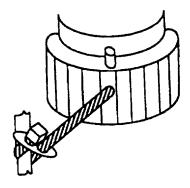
Assembly Nut Self-Looping Safety Cable Installation.
